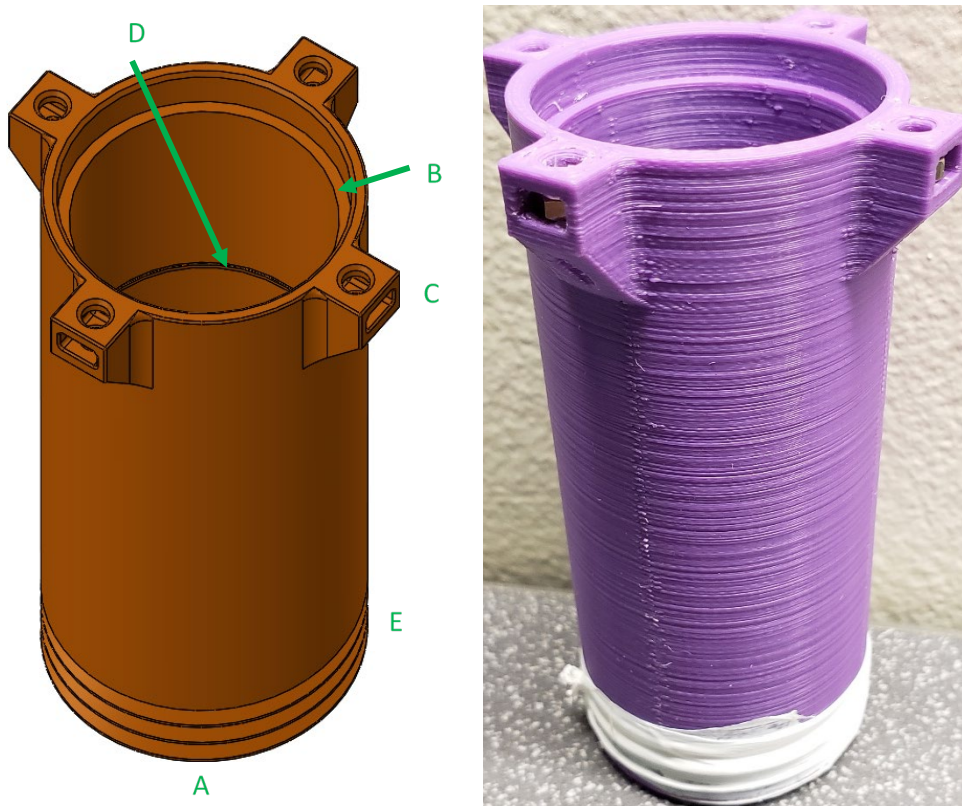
CAD of the version 1 cup and a 3D printed prototype. This part is approximately 3.3” tall.
